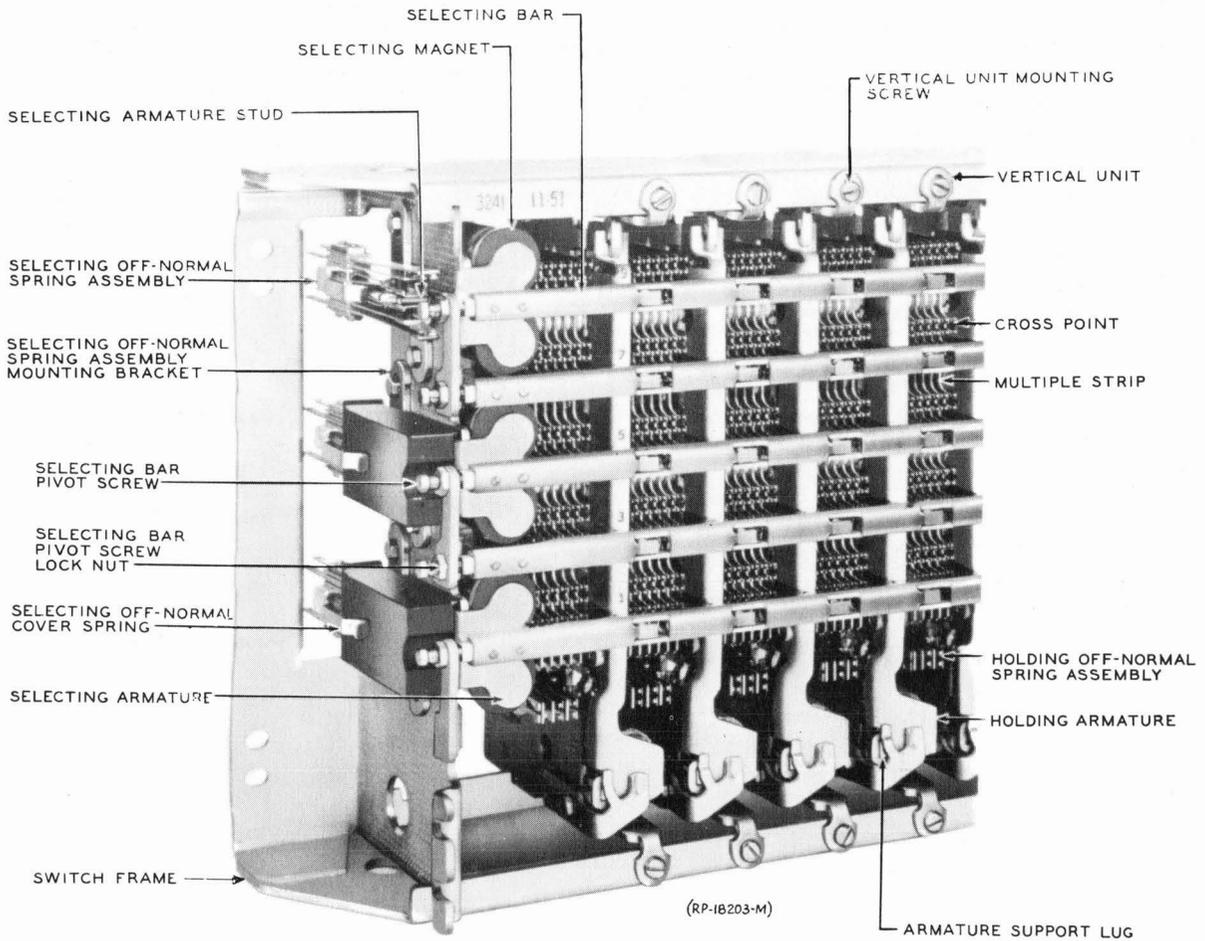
SECTIONAL VIEW OF 324 TYPE SWITCH
